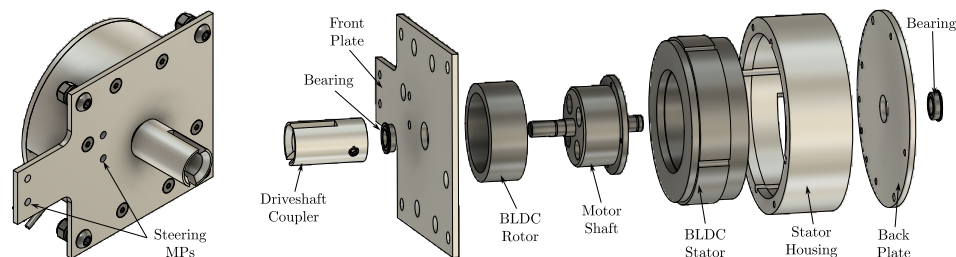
Driveline mechanical design, comprised of a custom front plate, rear plate, stator housing, motor shaft, and coupler. designed to incorporate the frameless BLDC motor. The driveline front plate incorporates standard mounting points (MPs) for the steering subsystem.
